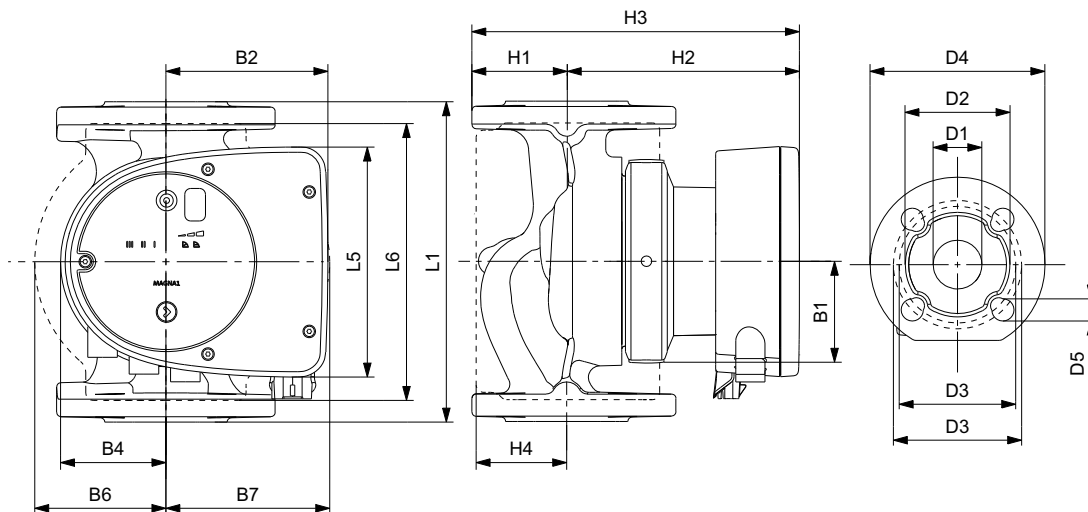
Single-head pump dimensions, plug-connected versions, flanged version
